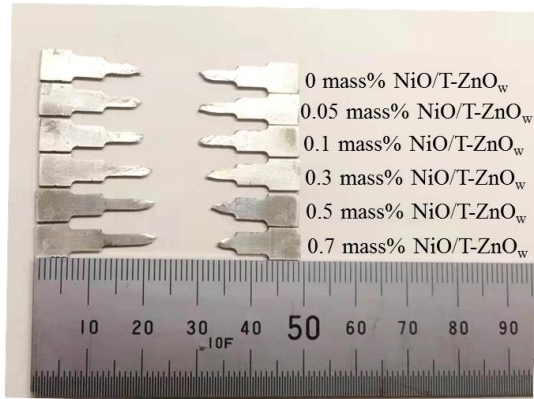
Photographs of the composite solder samples with various NiO/T-ZnO_w addition after tensile tests.
